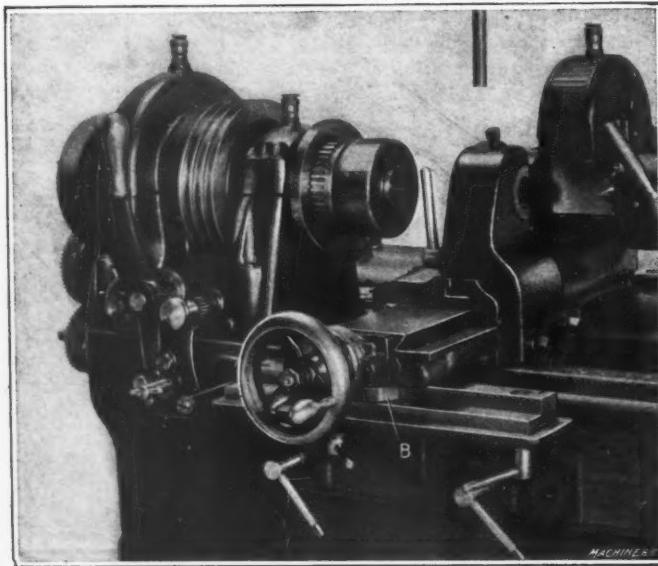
Taper Attachment applied to a Pratt & Whitney Thread Milling Machine
